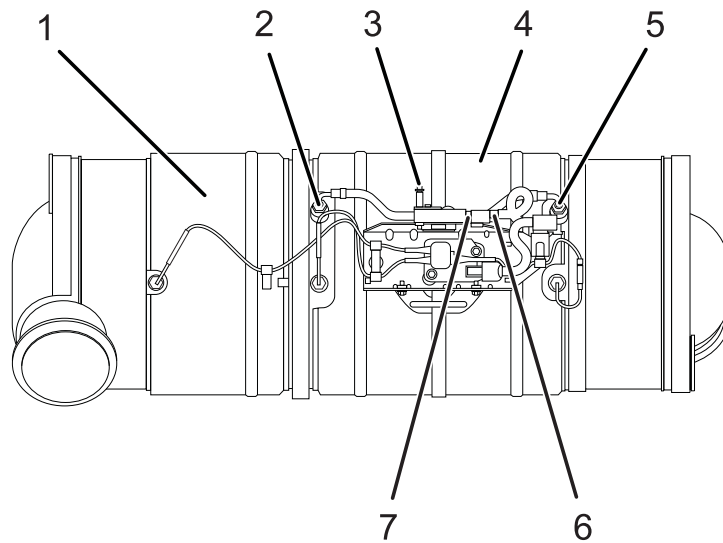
Diesel Particulate Filter (DPF) Differential Pressure Tube.
